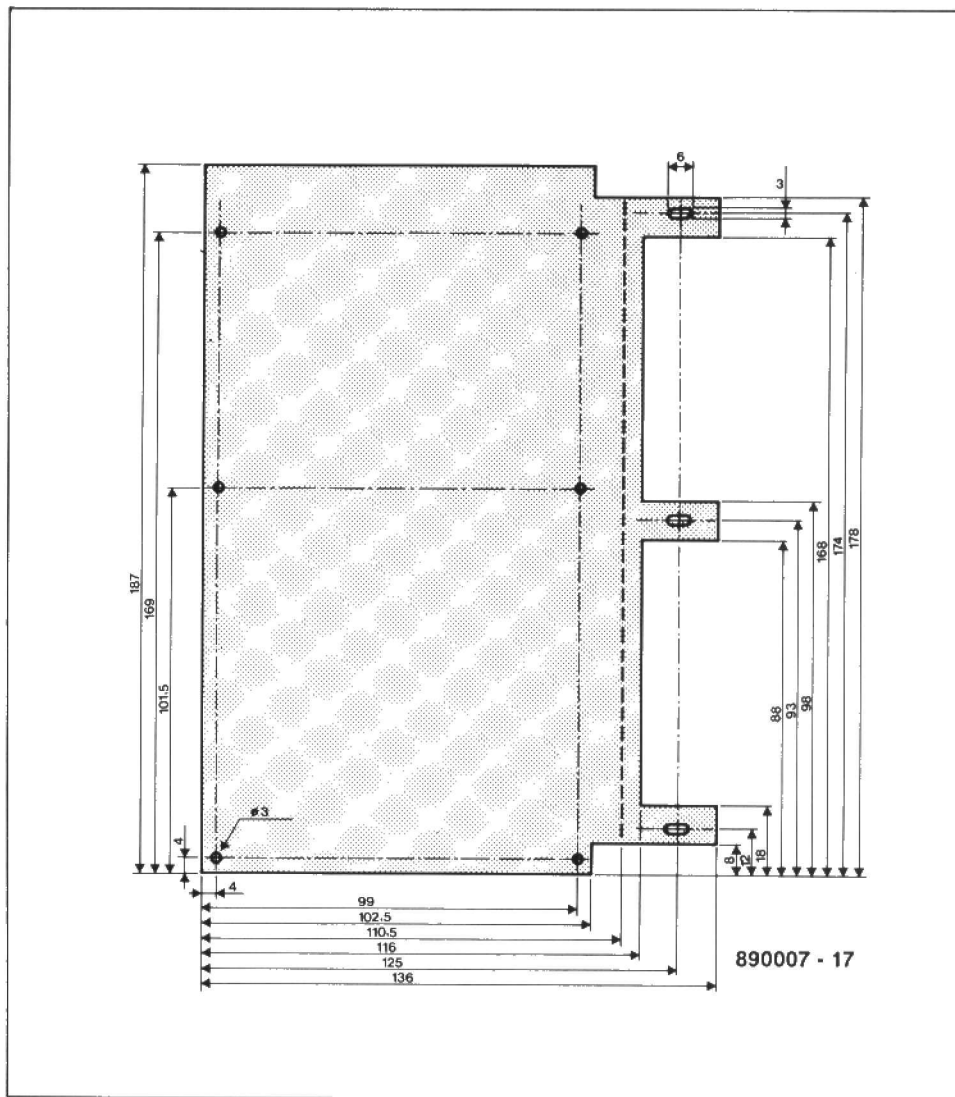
Drilling template for a support bracket that holds the keyboard.
